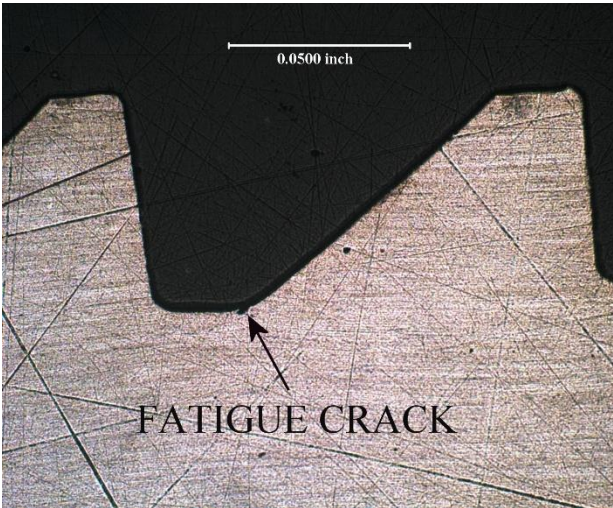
25X Fatigue Crack Thread Root
